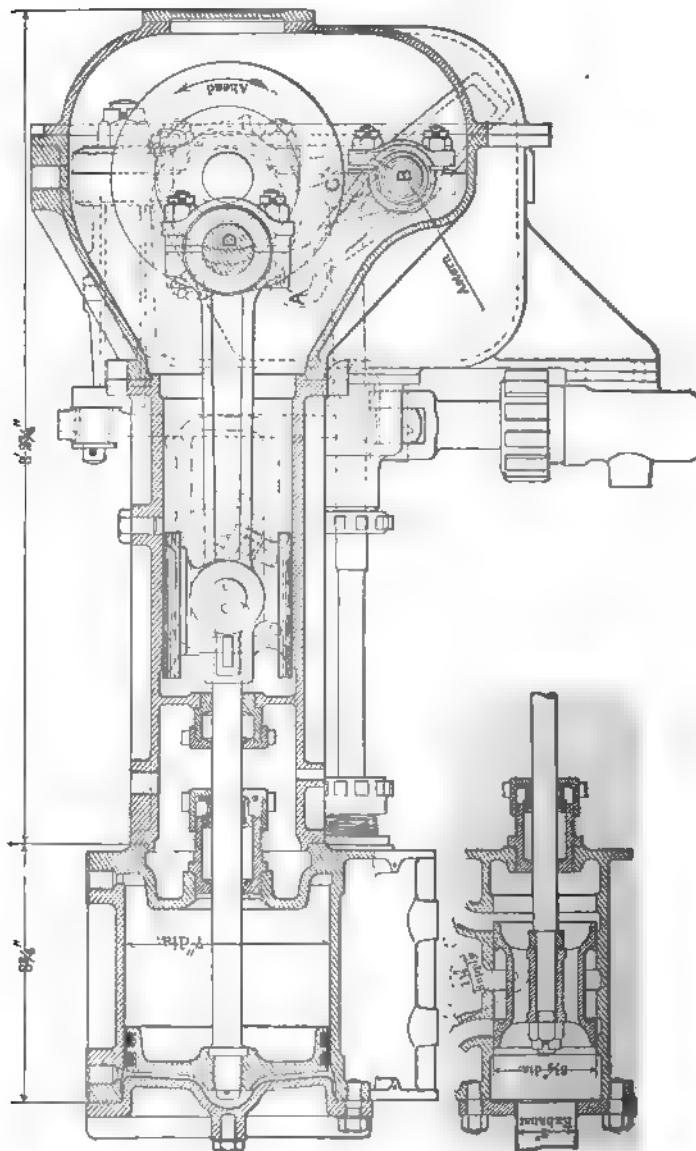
Sectional View of the Thorycroft Compound Steam Engine.
